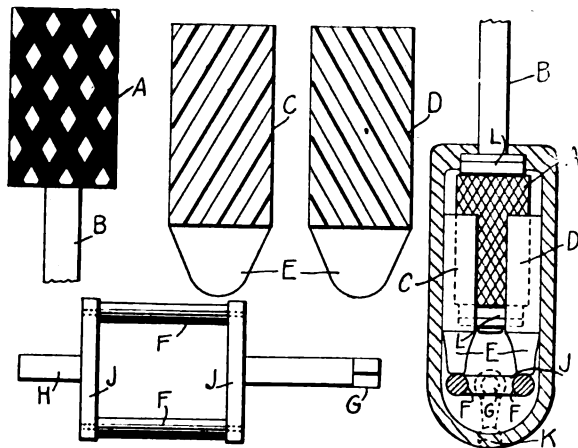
Parts and Assembled Block and Worm Steering Gear.
